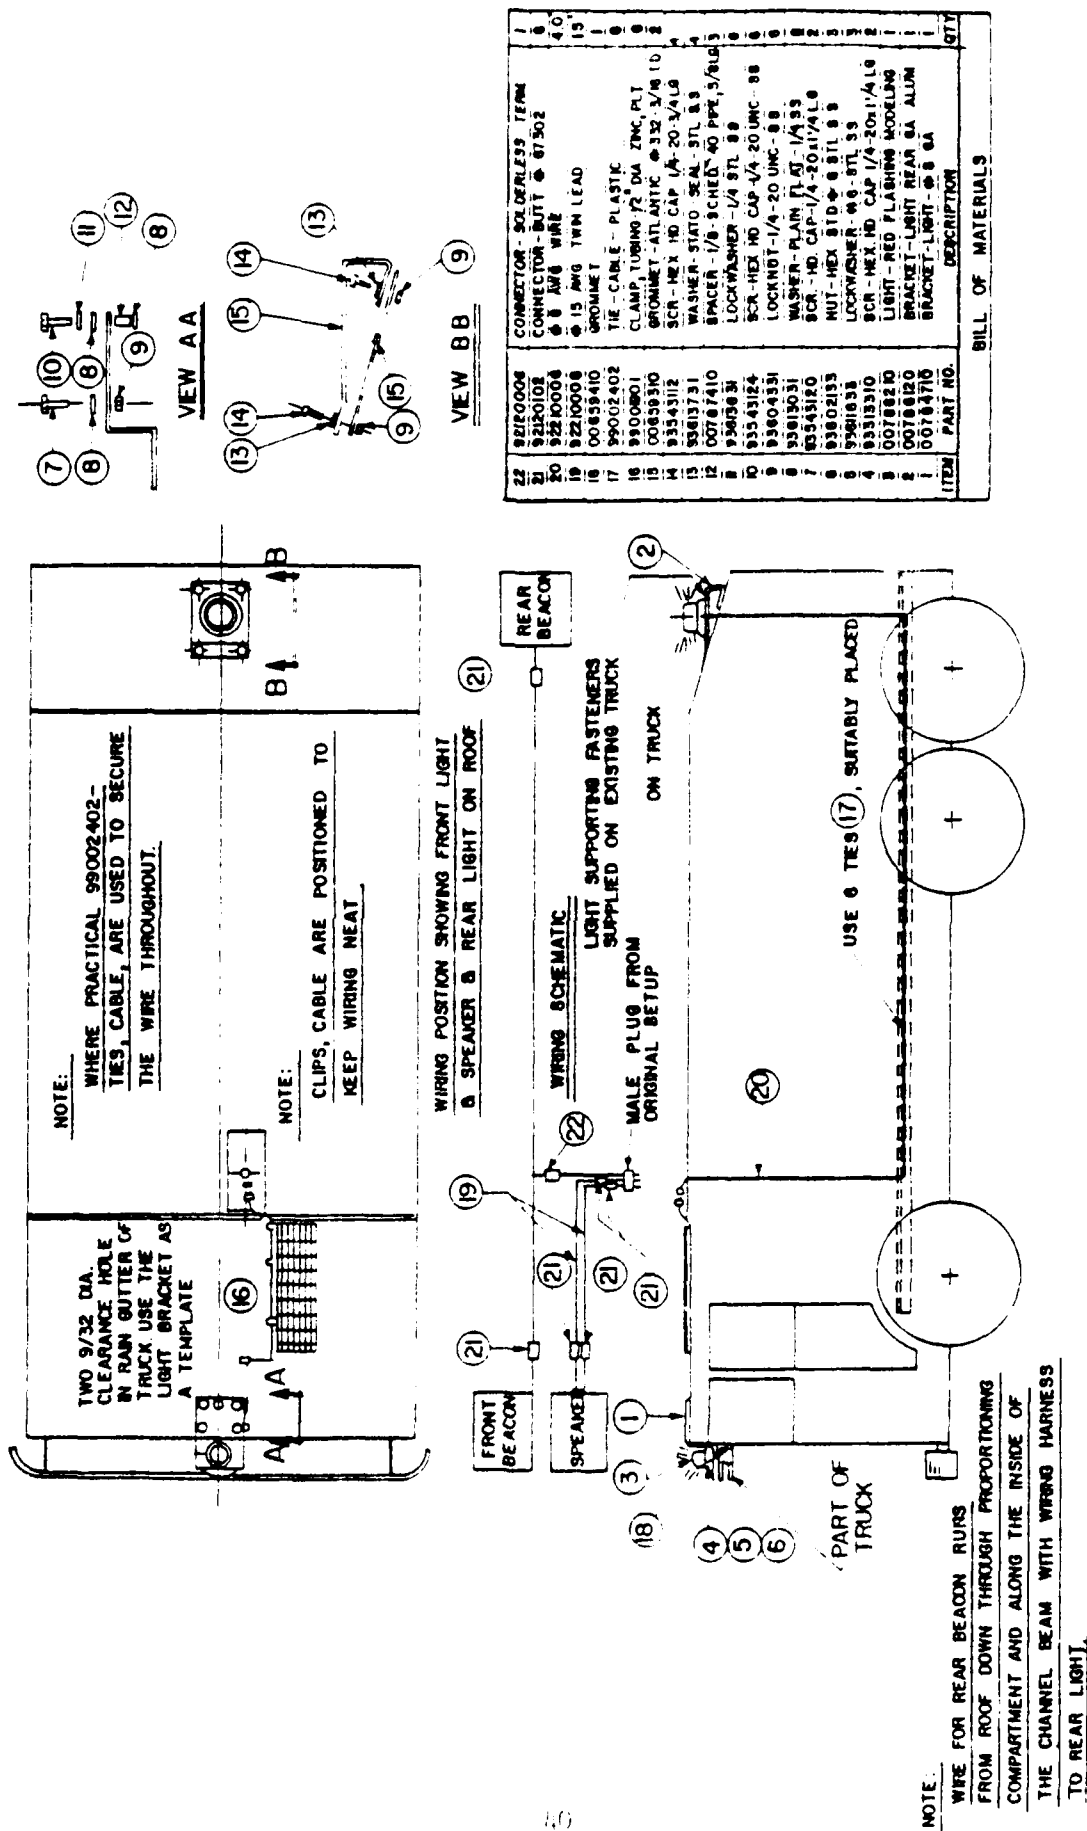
P-4 Speaker & Beacon Lights Wiring Assembly
